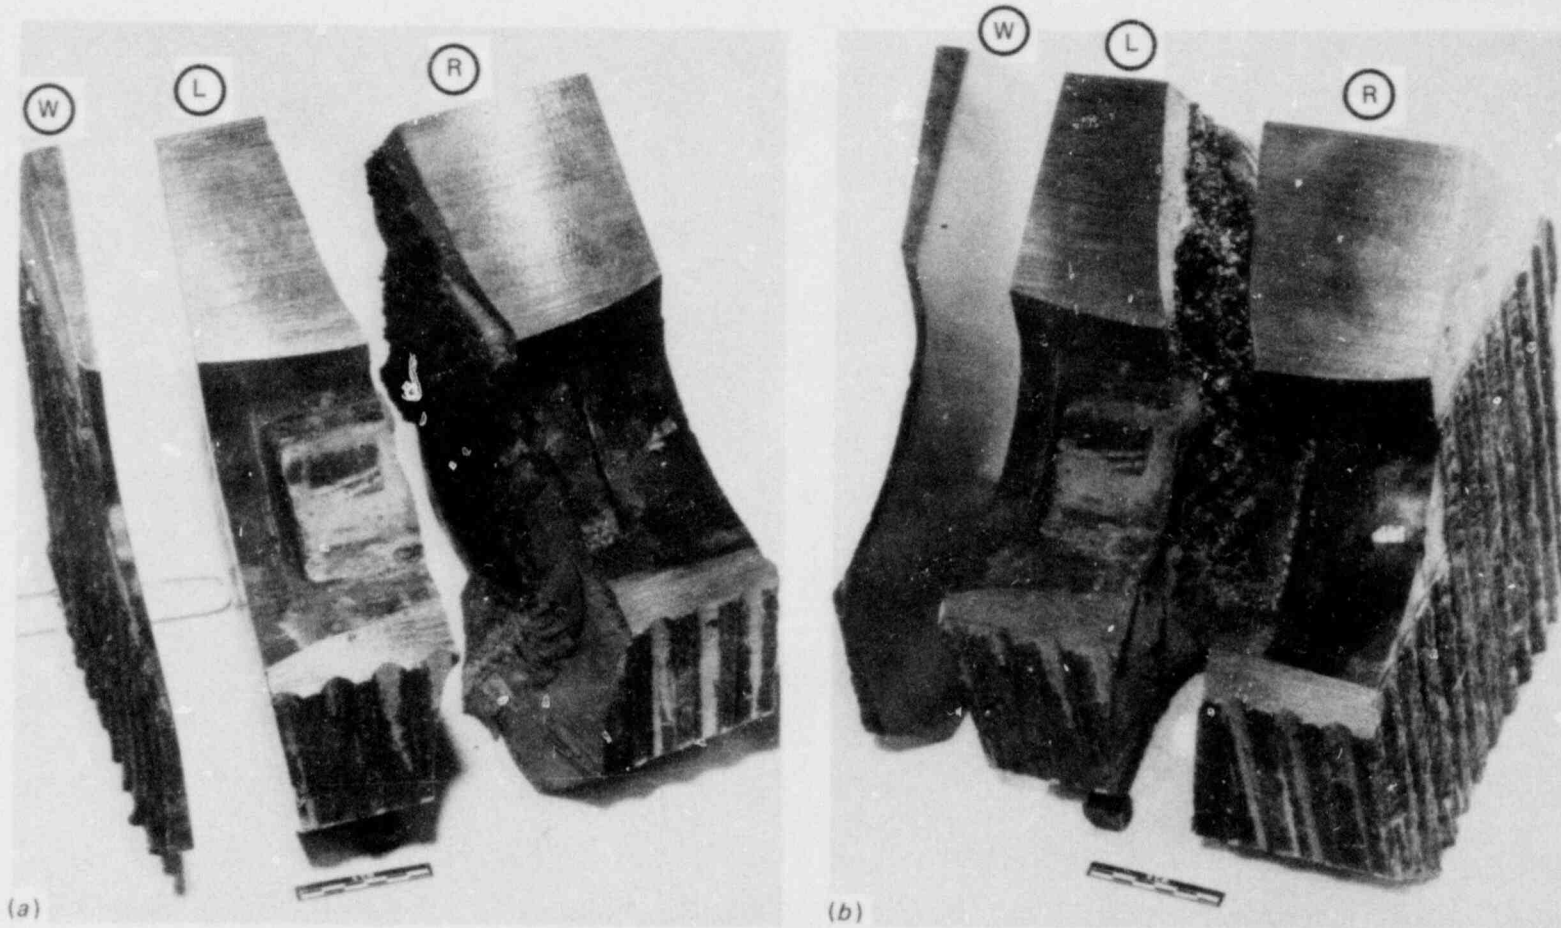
Reference Index: As-split block containing the flawed regions and slice W. The surface of slice W is etched to indicate the nozzle-corner fabrication weld.
